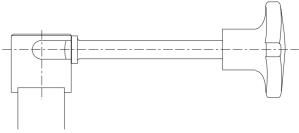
Tri-Clover LKB UltraPure butterfly valve regulating handle
